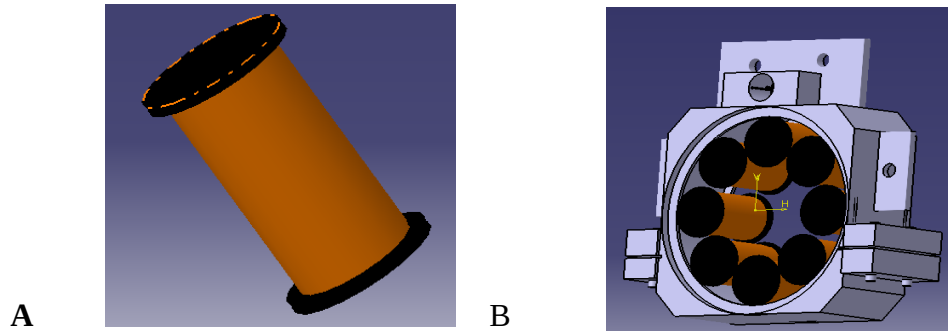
(A) single winding coil (B) several wing coil in housing
